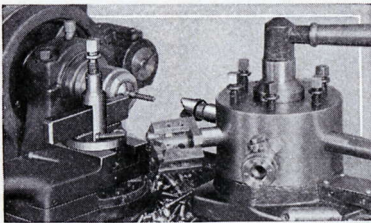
Using a Draw-in Chuck and Turret for Making Small Screws
